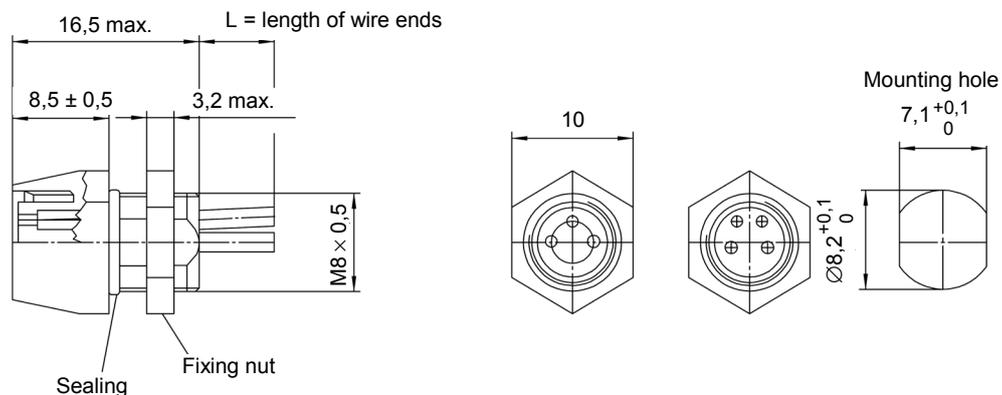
Fixed connector with wire ends, male contacts, single hole mounting
